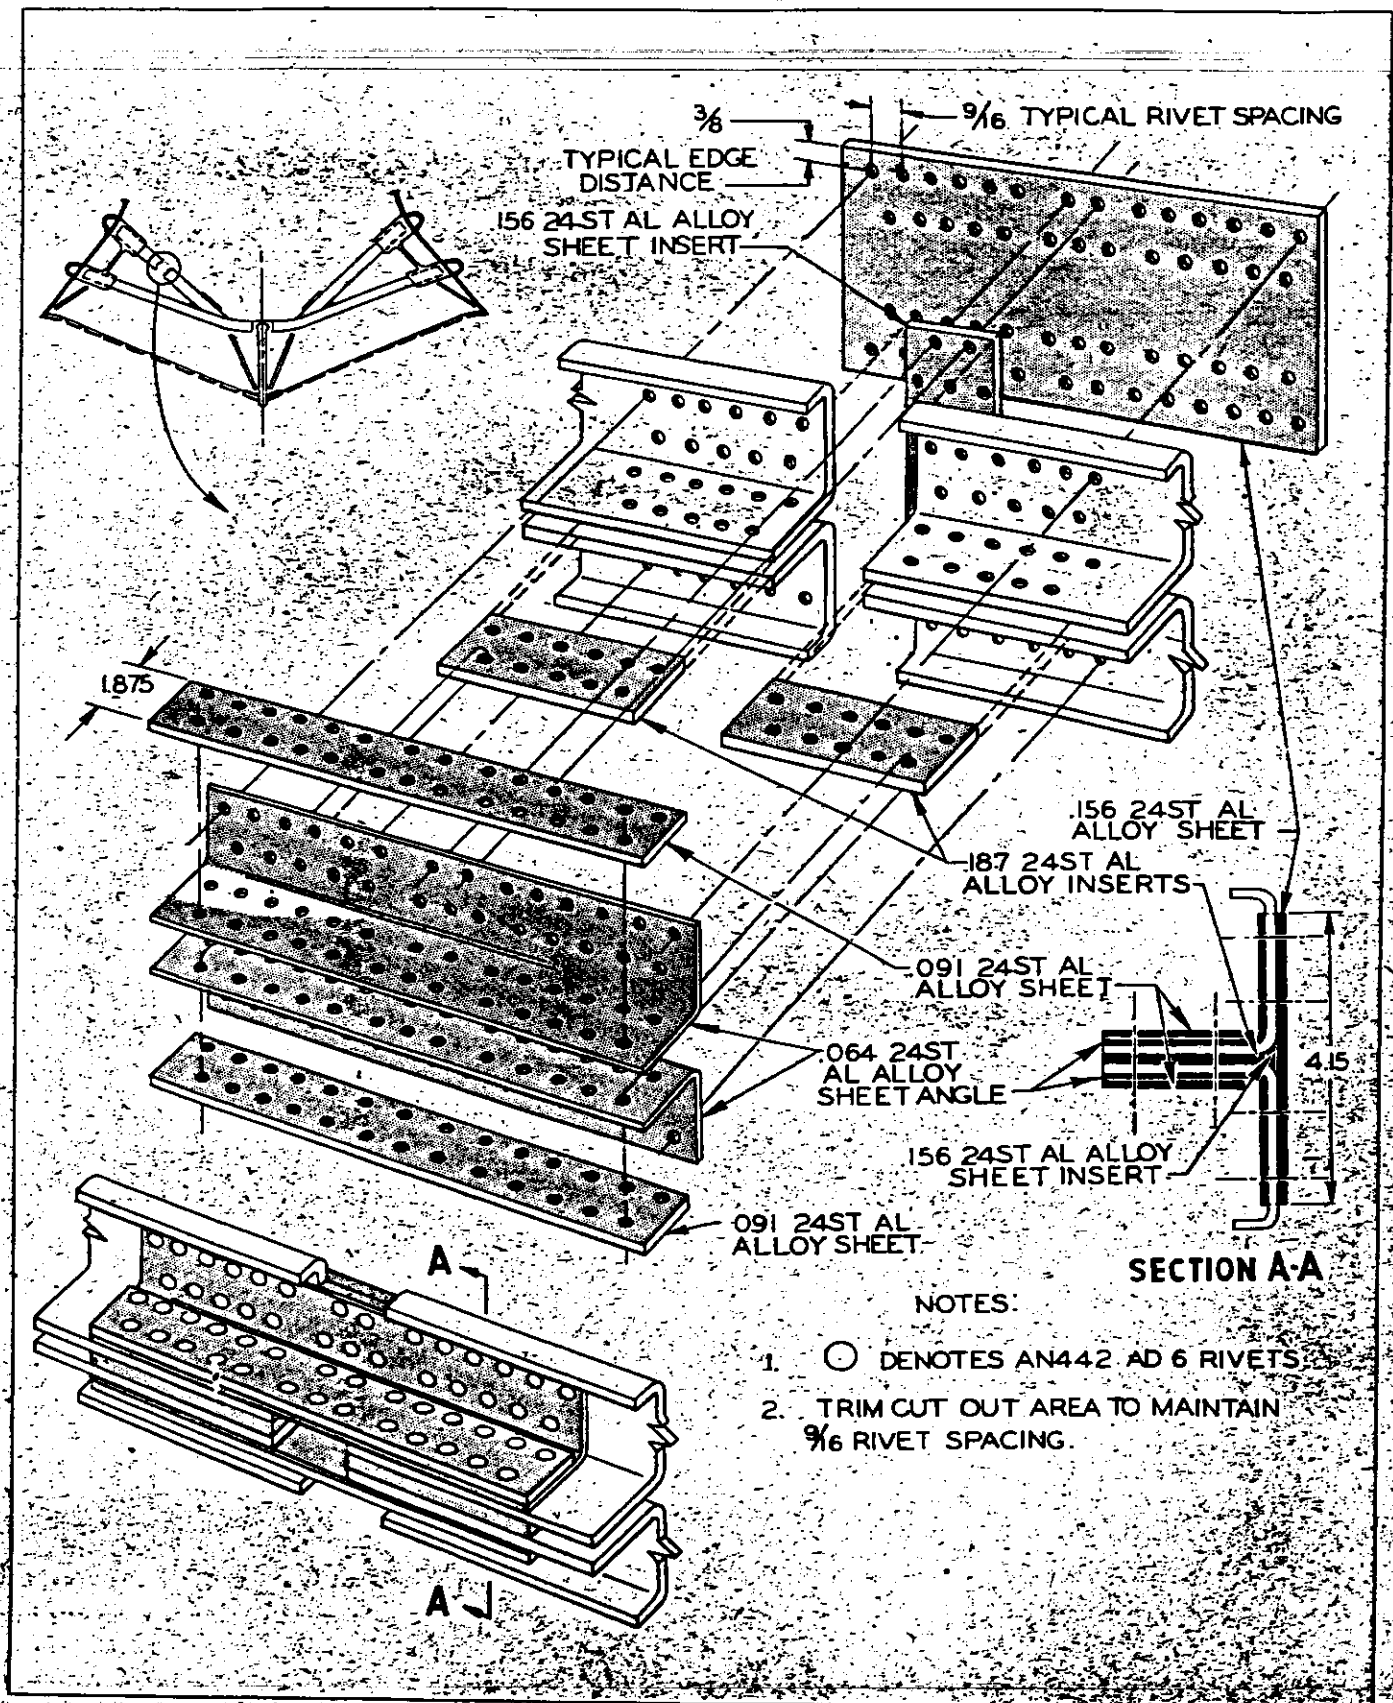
(Sheet 2 of 2 Sheets)—Beltframe 4.2 Repairs
